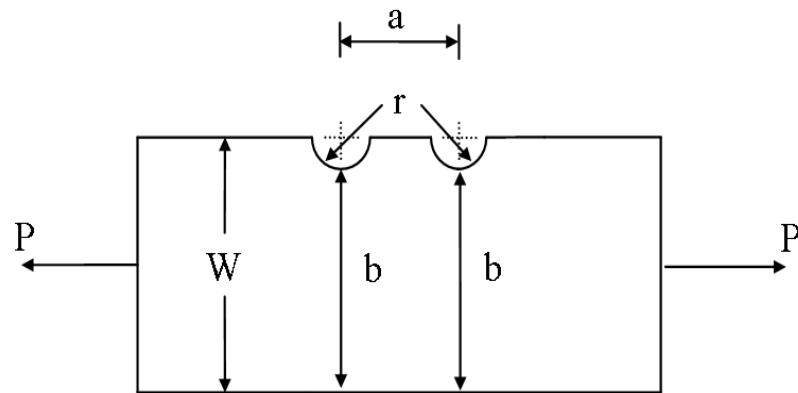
Two Closely Spaced Notches in a Finite Width Plate
